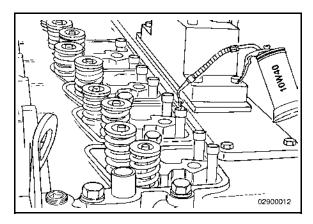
LUBRICATE THE PUSH TUBE SOCKETS
